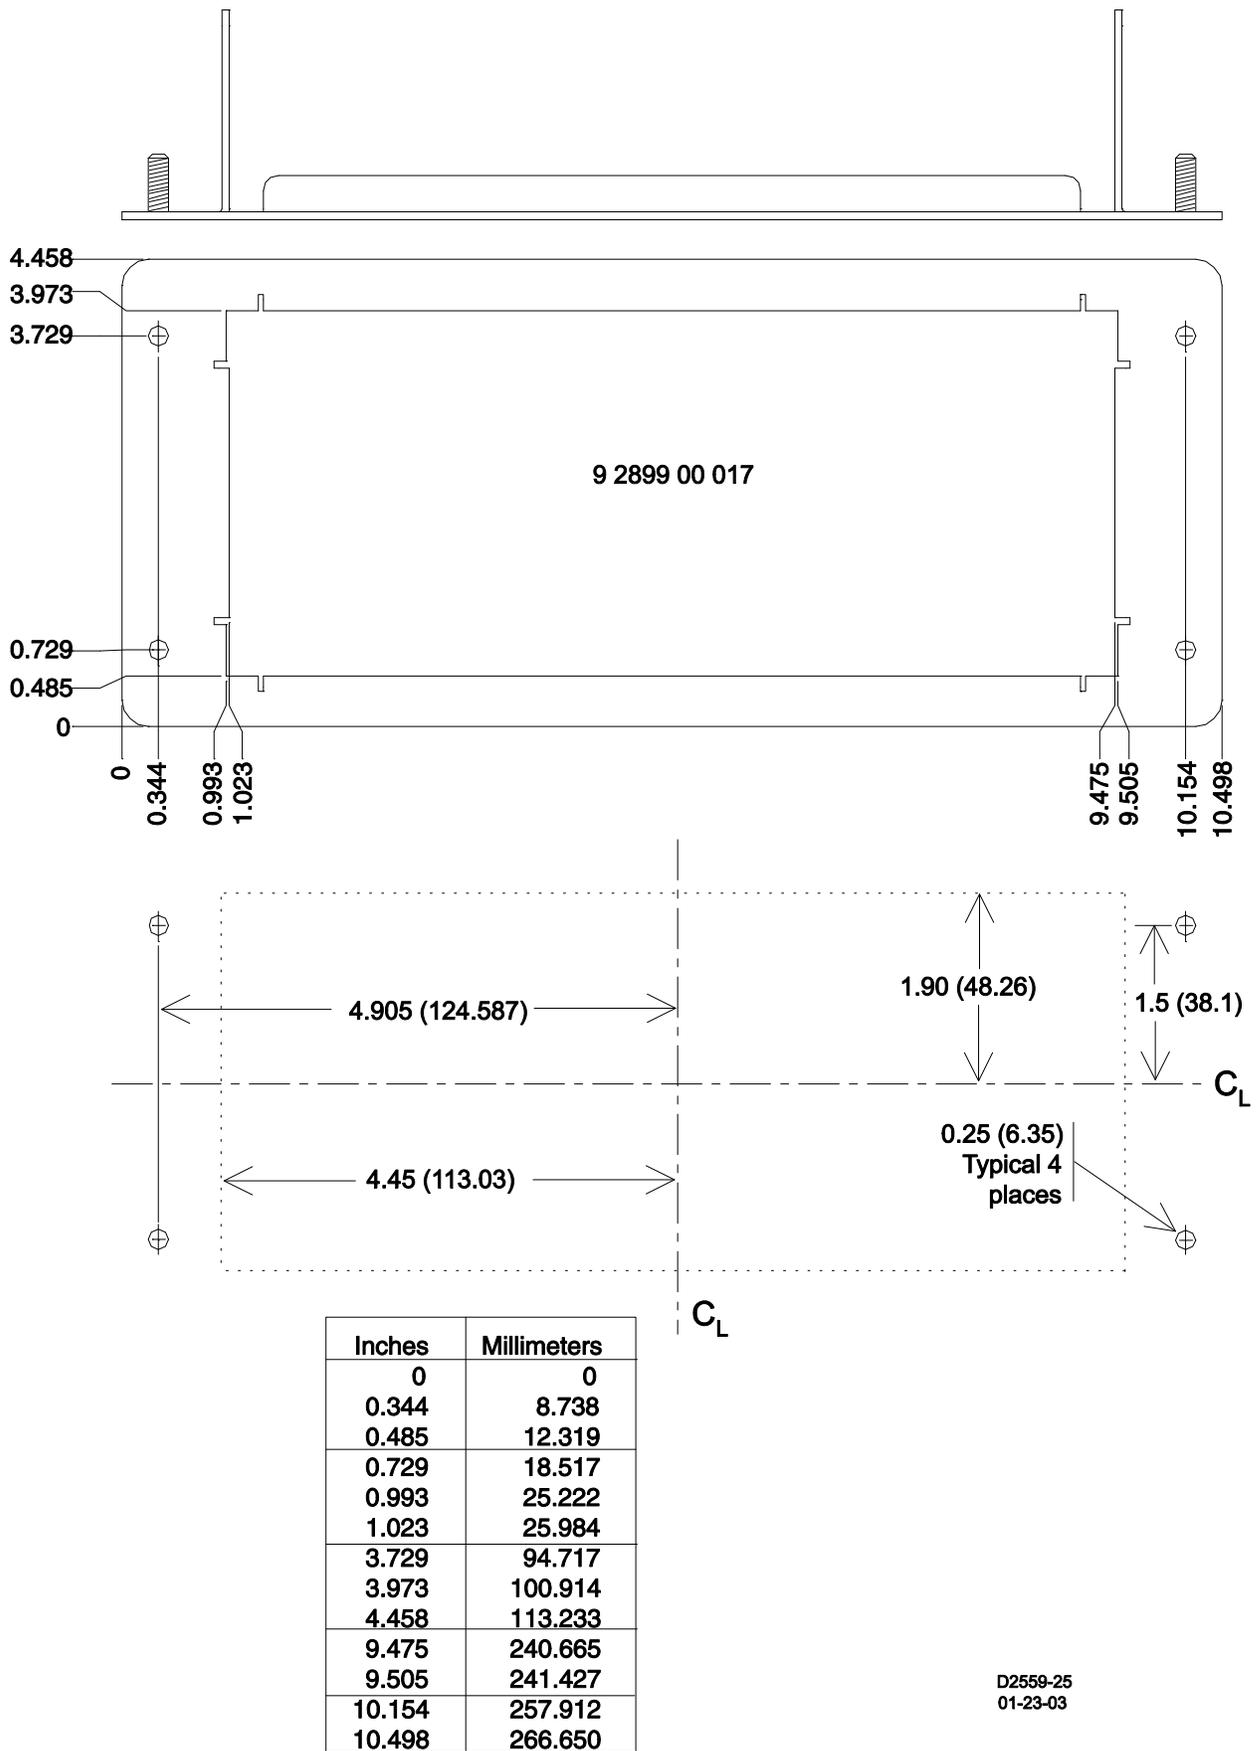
Single H1 Relay Escutcheon Plate and Cutout Dimensions
